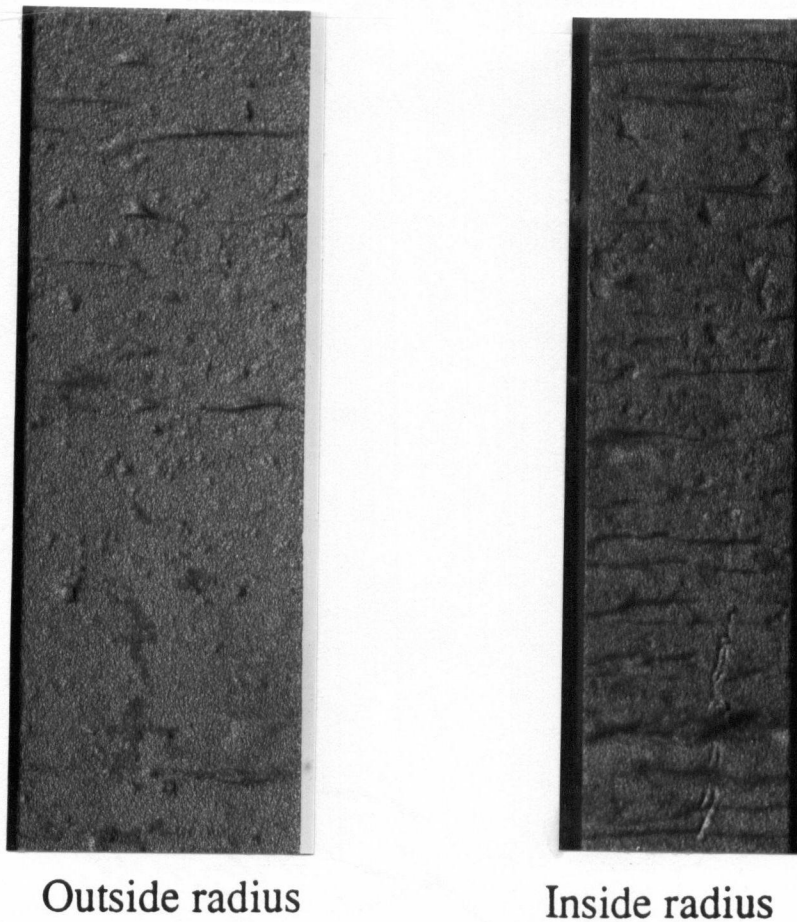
Surface appearance of the samples on the inside and the outside radius showing the rolled-out oscillation marks.
